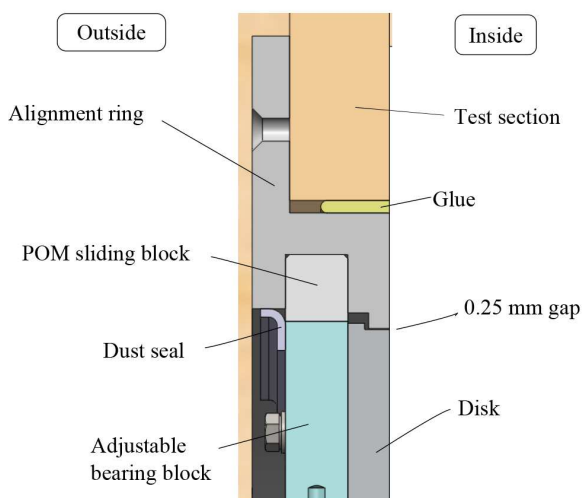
Detailed view of the assembly of the outer, non-rotating aluminium ring and the rotating aluminium disc in which the rotor blade section is mounted. The adjustable bearing block allow for a precise and smooth rotation.
